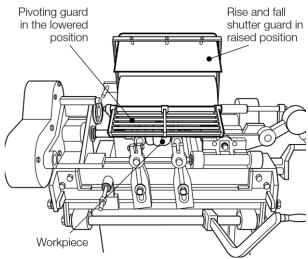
Position of guards during machining of the work piece (pivot guard lowered to prevent access to rotating cutters and work piece, shutter guard in raised position)
